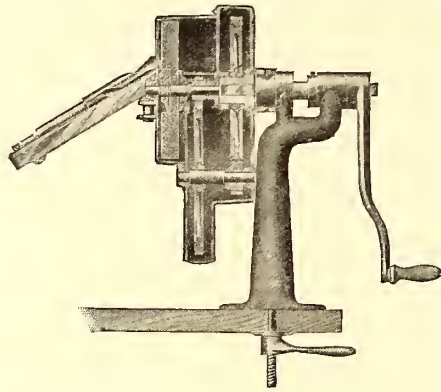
TOOL GRINDER MOUNTED ON IRON COLUMN
